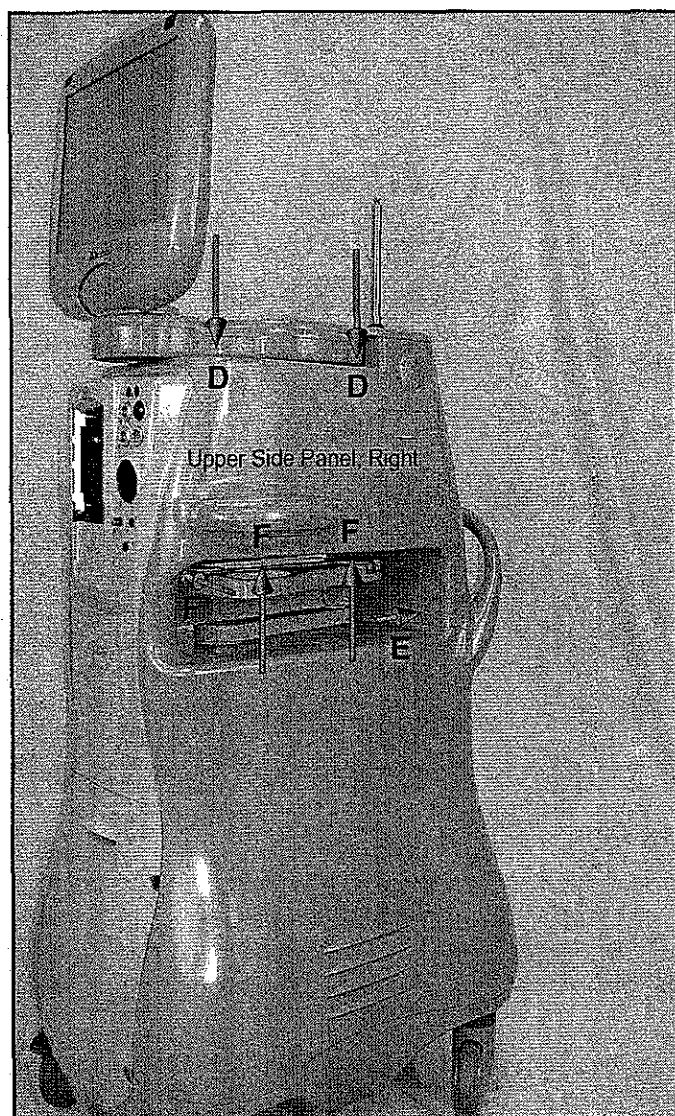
Fastener Locations for Upper Side Panel. This panel must be removed before the Lower Side Panel can be removed.
